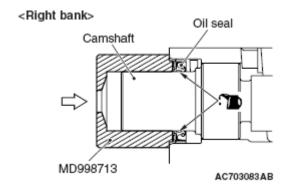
Installing Camshaft Oil Seal (Right Bank)
